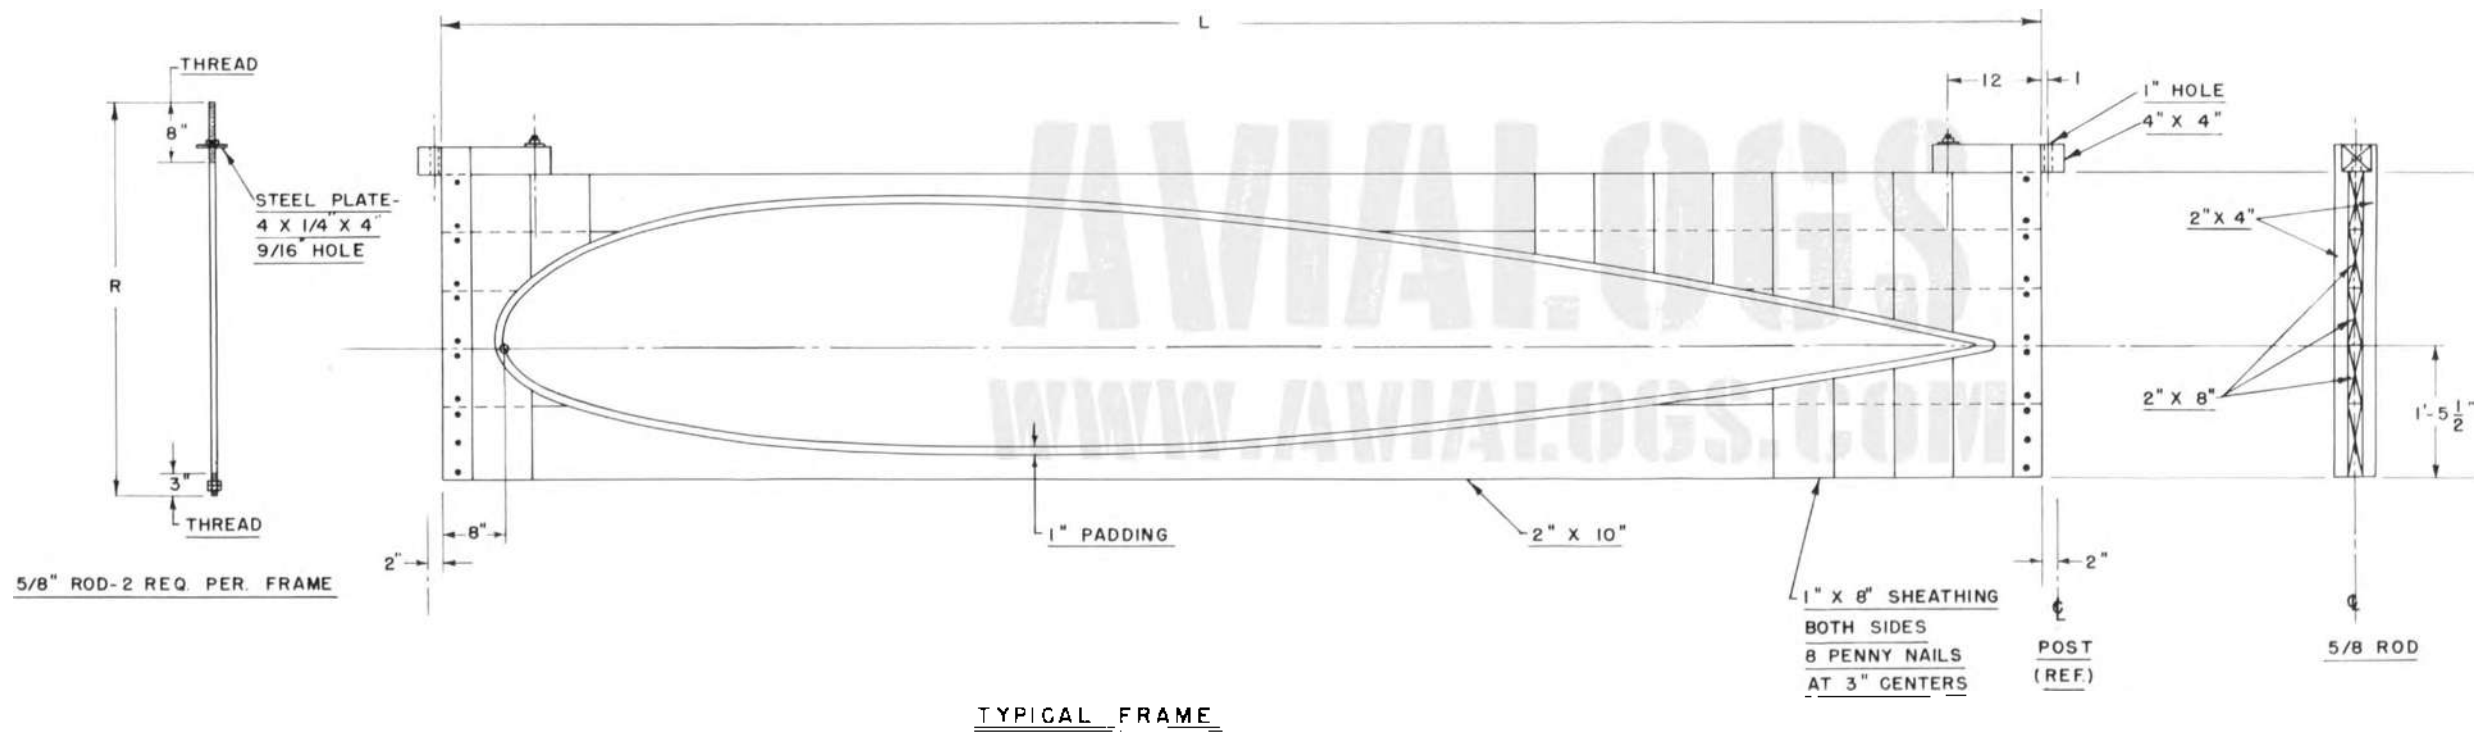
WING OUTER PANEL HOLDING JIG—SHEET 1 OF 2 SHEETS
